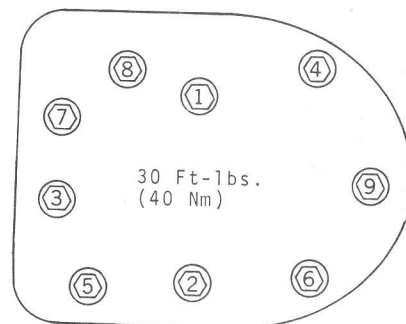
Cylinder Head Bolt Tightening Sequence (210, 212, 214 and 216 Tractors)
